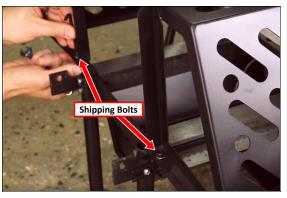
Removing the shipping bolts from the rear cage and the frame.
